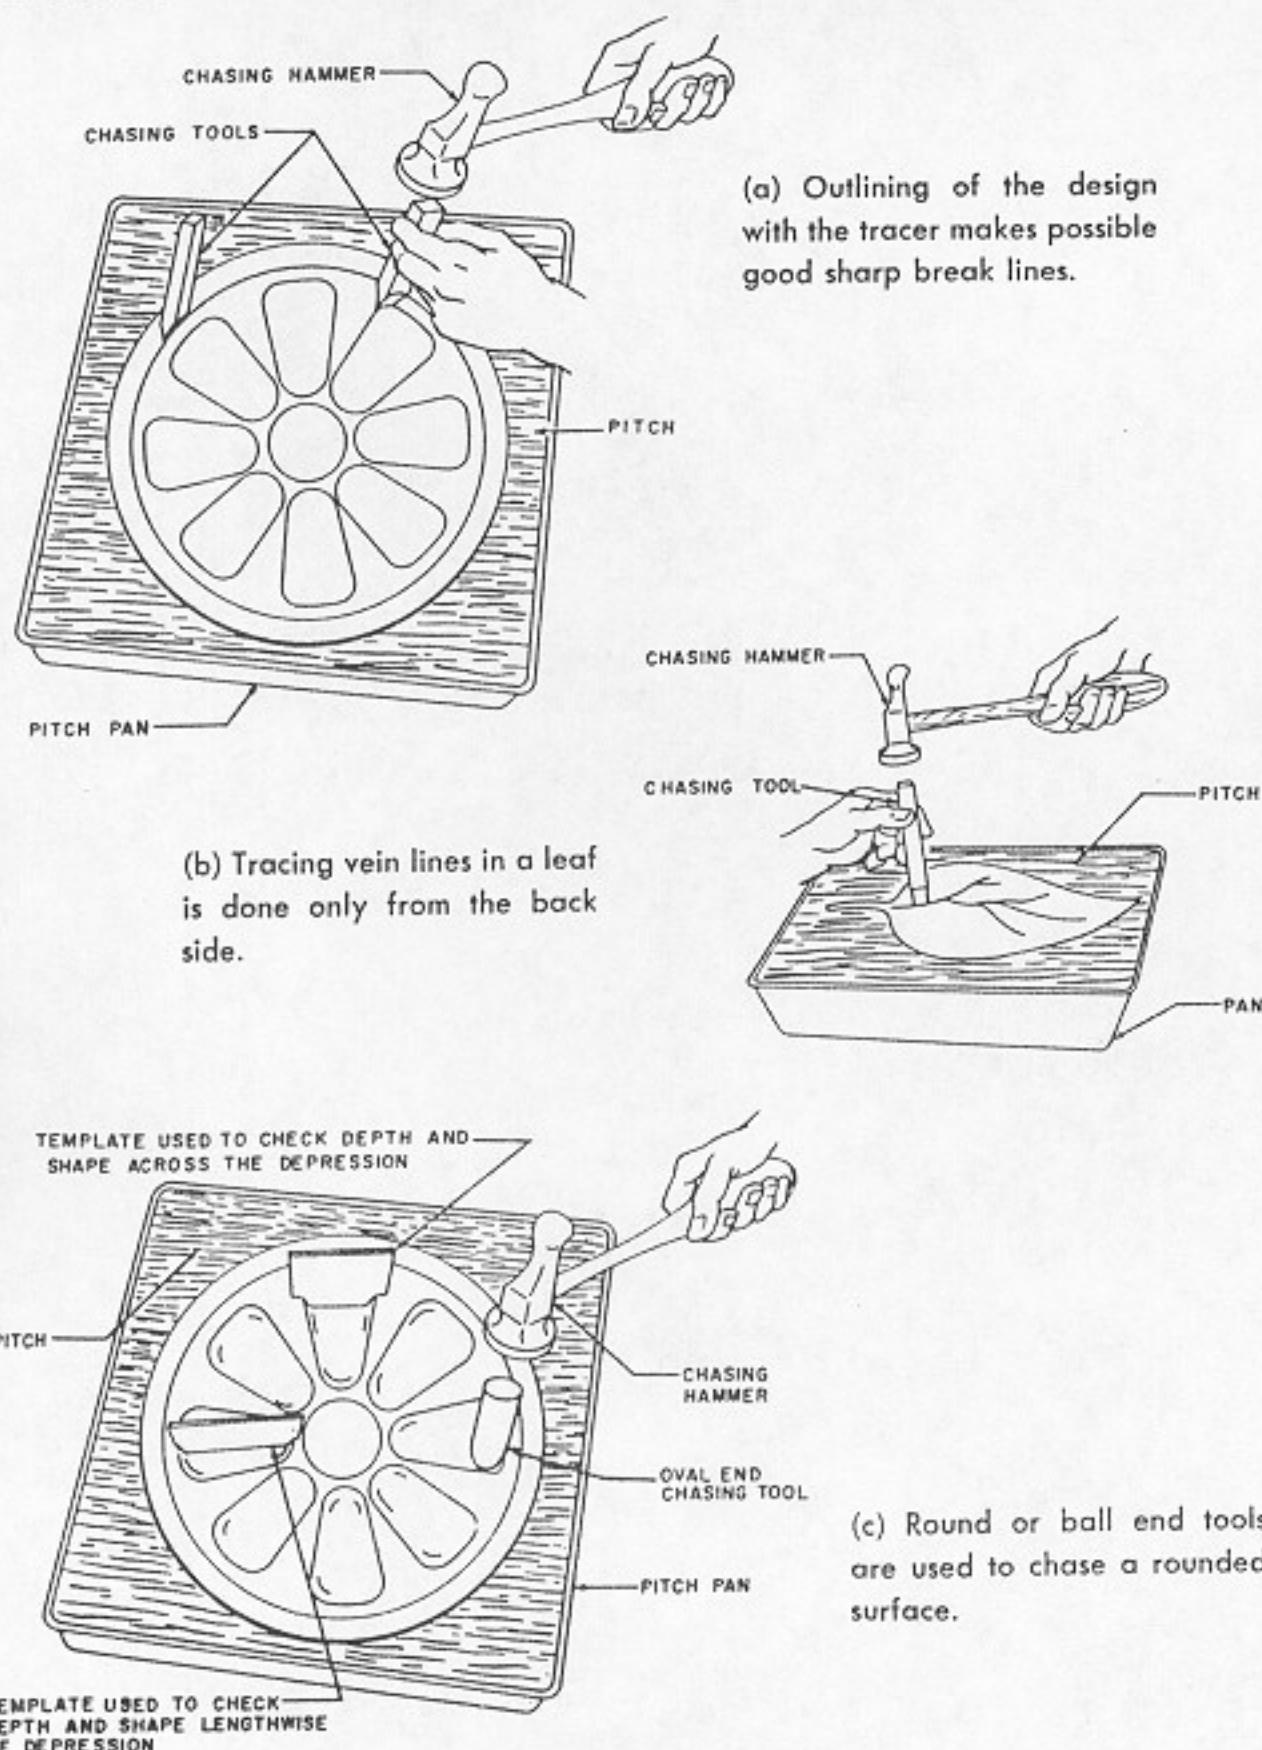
The chasing of vein lines as shown is done only with tracing tools. The more intricate designs require an assortment of chasing tools.
